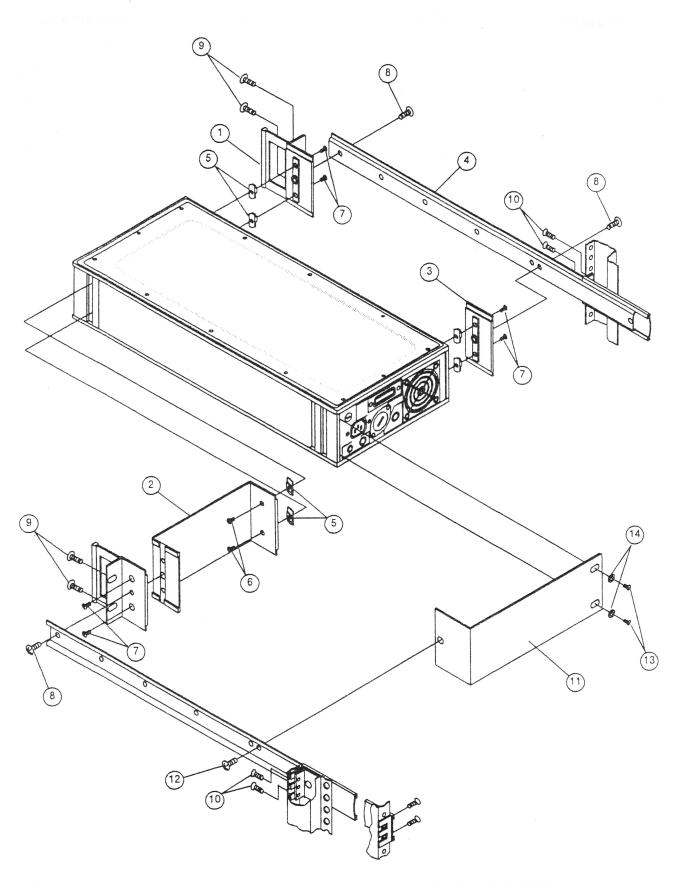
Accessory 016 - Chassis Slide Kit for One EIP 625A.
